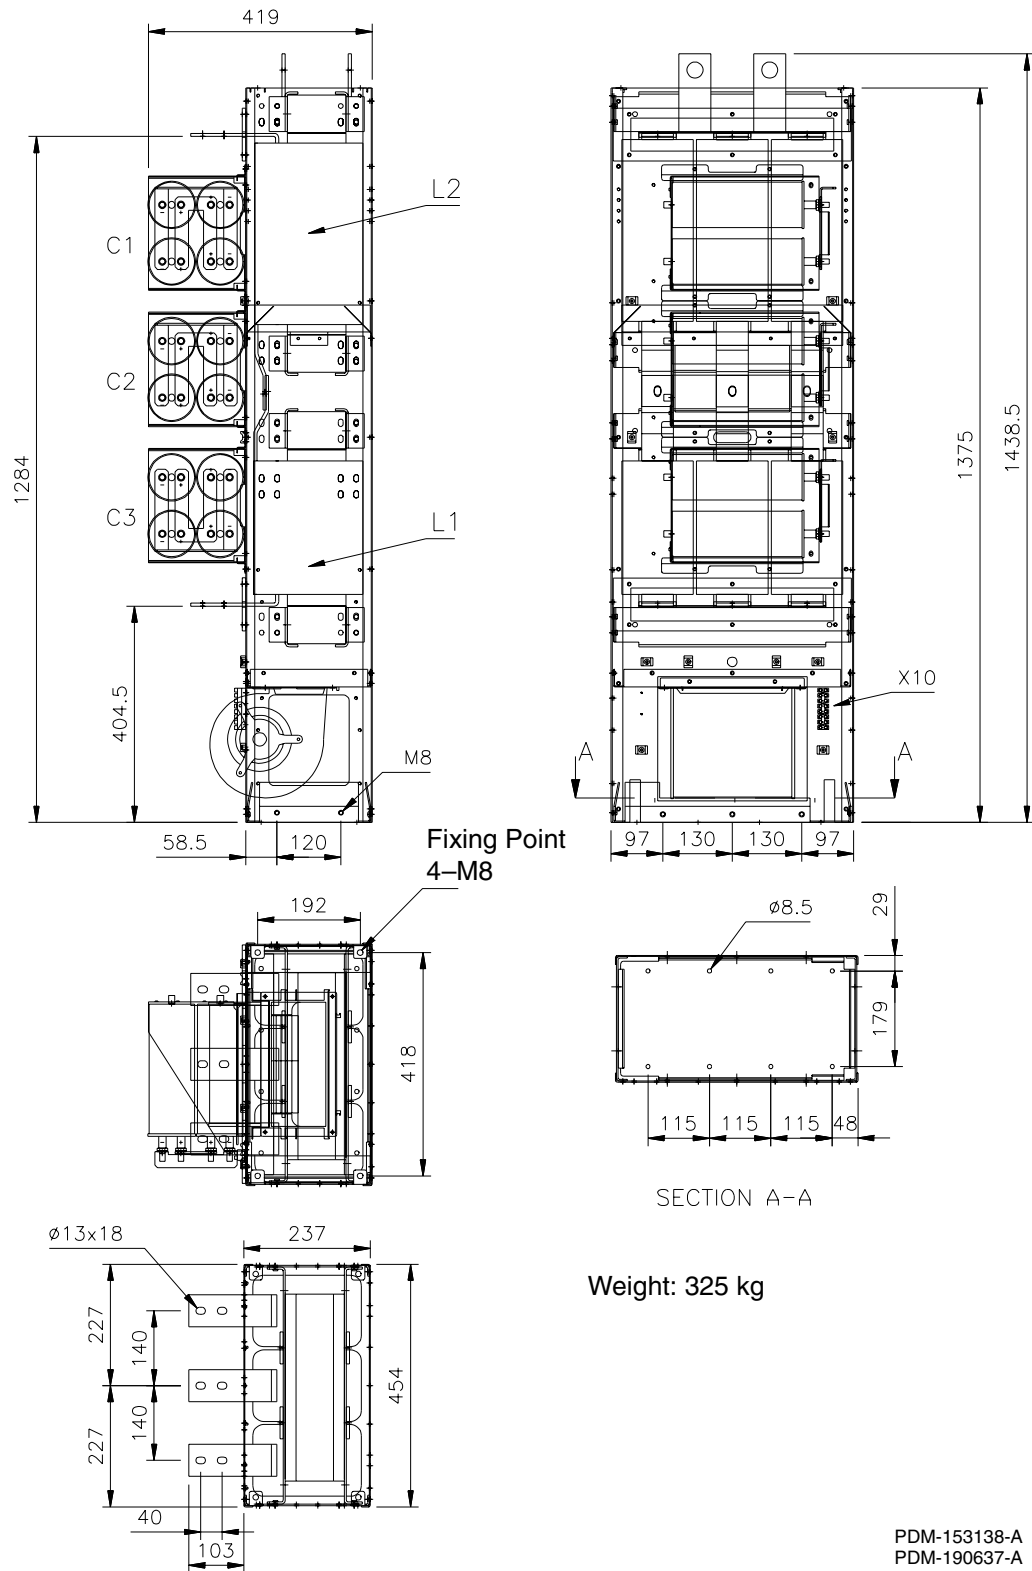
ISU_LCL_5R12 dimensions, fixing points and connectors.
